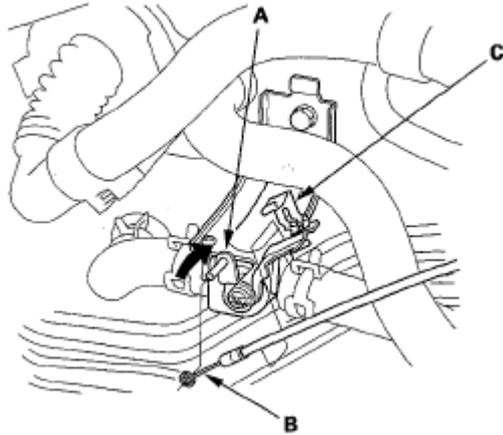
Identifying Heater Valve Arm, Heater Valve Cable And Cable Clamp
